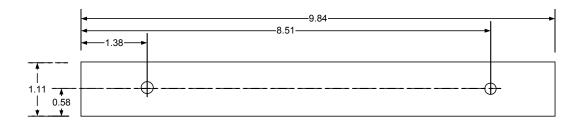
44B295864-001 Grounding Bar Dimensions, Rear View Showing Mounting Holes
